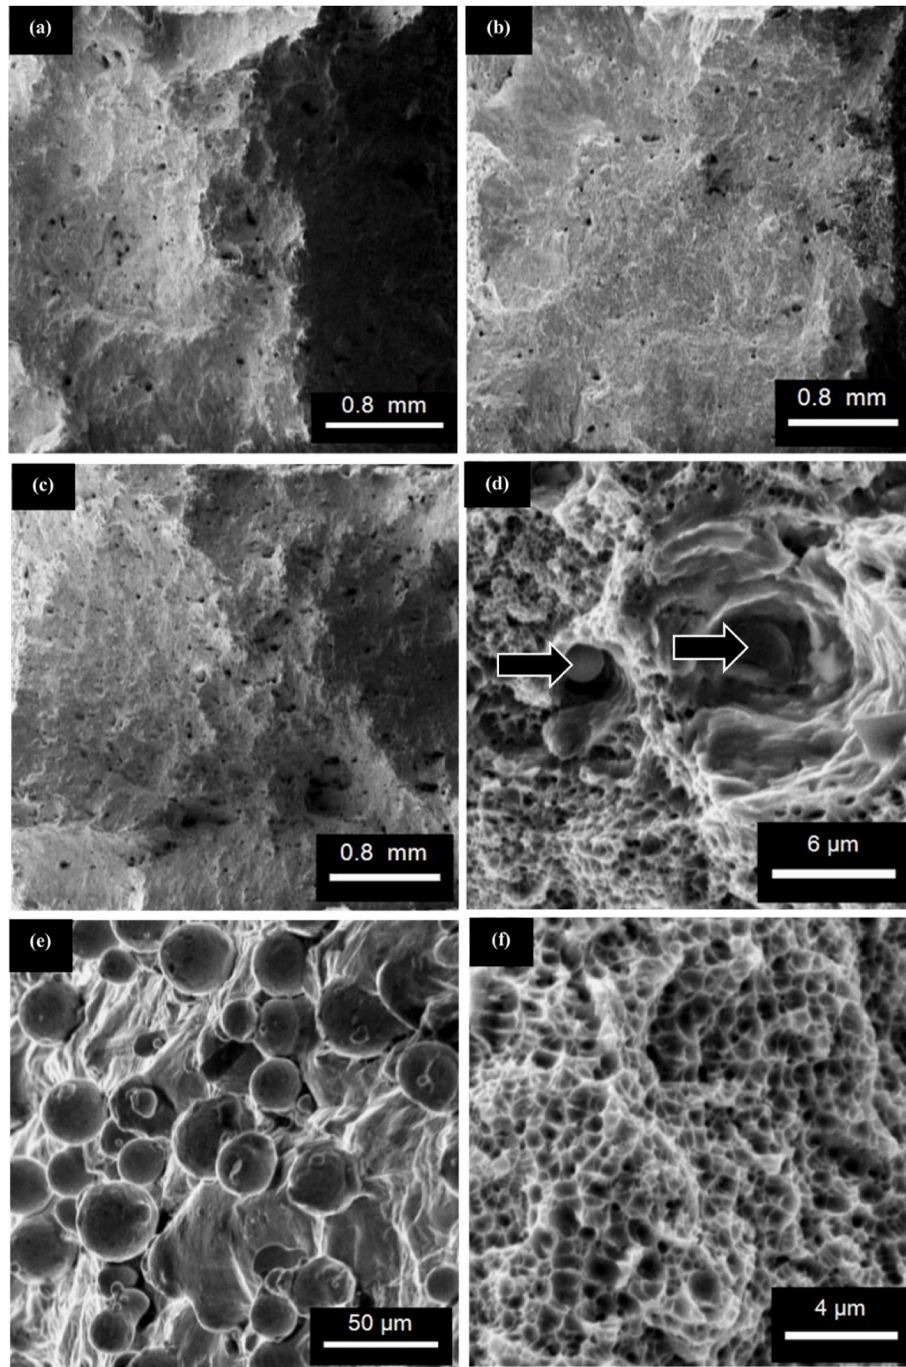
Fractography of tensile specimens of SLM SS316L at three different scanning speeds: (a) 1100 mm/s (b), 1200 mm/s, and (c) 1300 mm/s (e), (d) and (f) high magnification images of tensile specimens' fractured surfaces.
